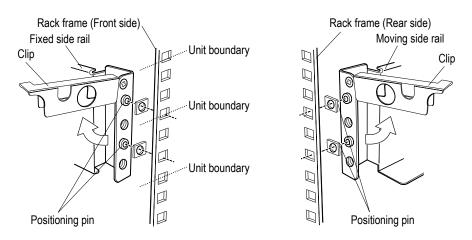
Removing Drive Box (2U) Installation Rails (for Circular Hole) - 2
